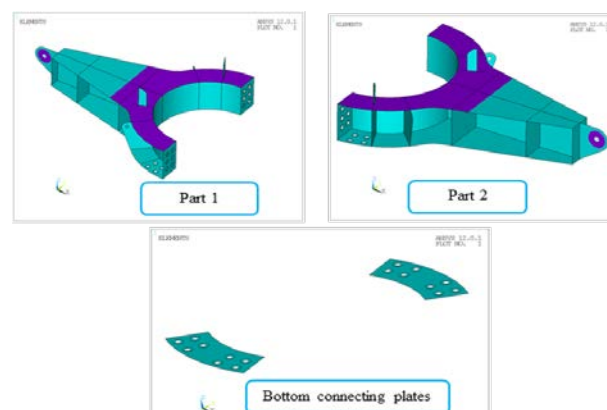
BLOWOUT PREVENTER LIFTING FRAME PARTS
